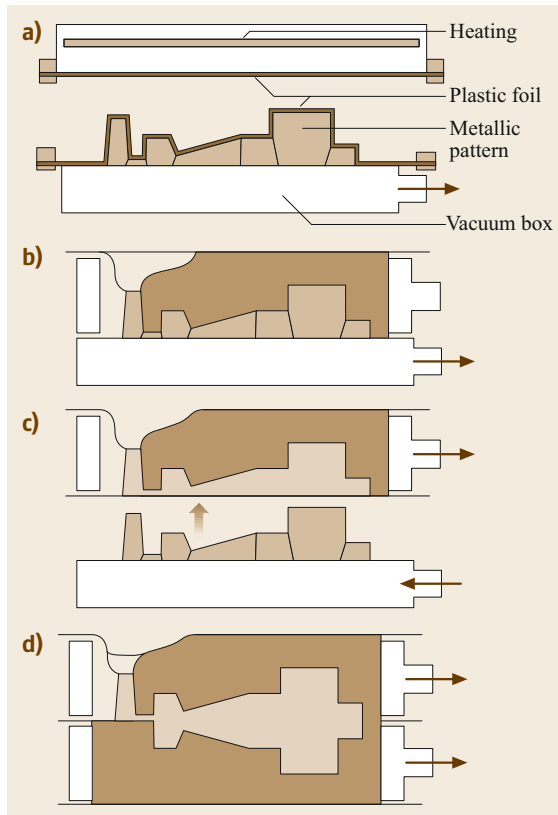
d Vacuum molding: (a) The plastic foil is softened by means of a foil-type heating element and drawn tightly against the pattern by vacuum through holes. (b) The mold box is placed on top, filled with binderless sand, precompacted, and the top of the box is covered with plastic foil. (c) Vacuum is applied to the mold box, compacting the sand. By switching off the vacuum, the mold box can easily be lifted off the pattern. (d) The top and bottom halves of the box are joined. The vacuum is maintained during pouring [10.1, 6]
